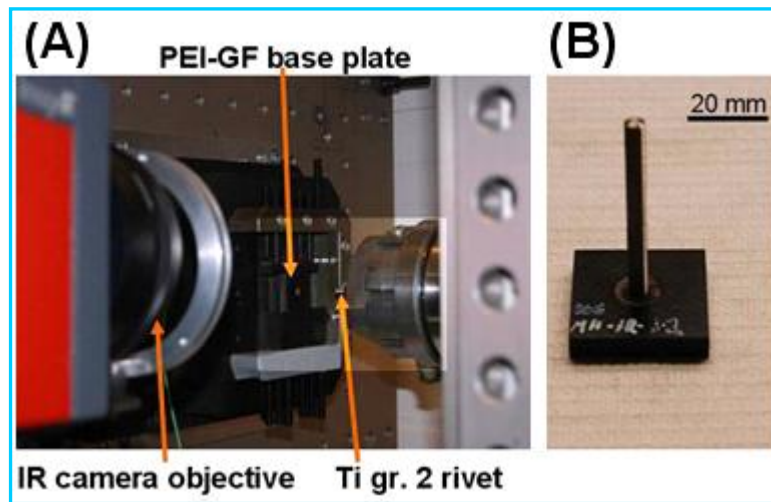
A) Experimental setup for infrared temperature measurement. B) friction-riveted specimen after joining.
